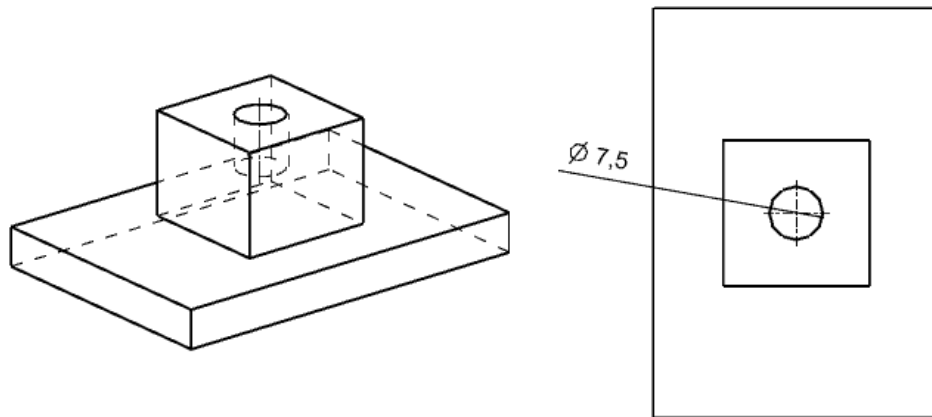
Schematic drawing of the projector optics mount, all dimensions are shown in mm.
